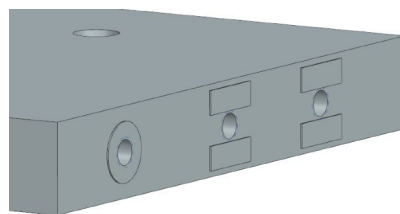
Contact pads at threaded holes. The shapes of the contact area are adapted to the shapes of the contact interface of the counterpart to be mounted.
